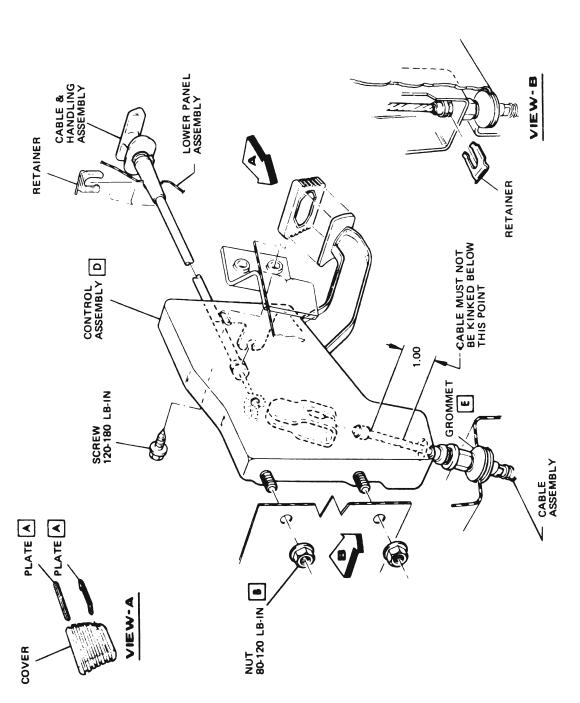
D-20 Parking Brake Control Assy. - B-C-E Car
